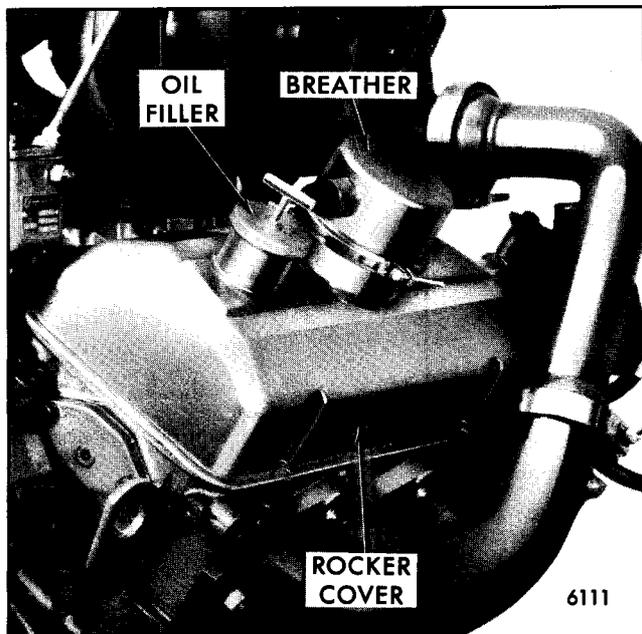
Rocker Cover Breather Mounting (6V-53 Engine)
